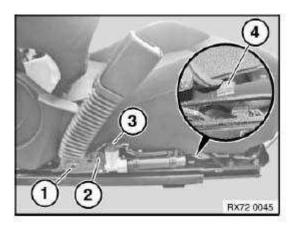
Identifying Plug Connection And Retainer Courtesy of BMW OF NORTH AMERICA, INC.
